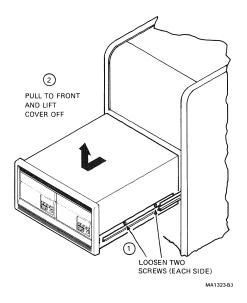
Removing the Rackmount Cover/Bezel Assembly
